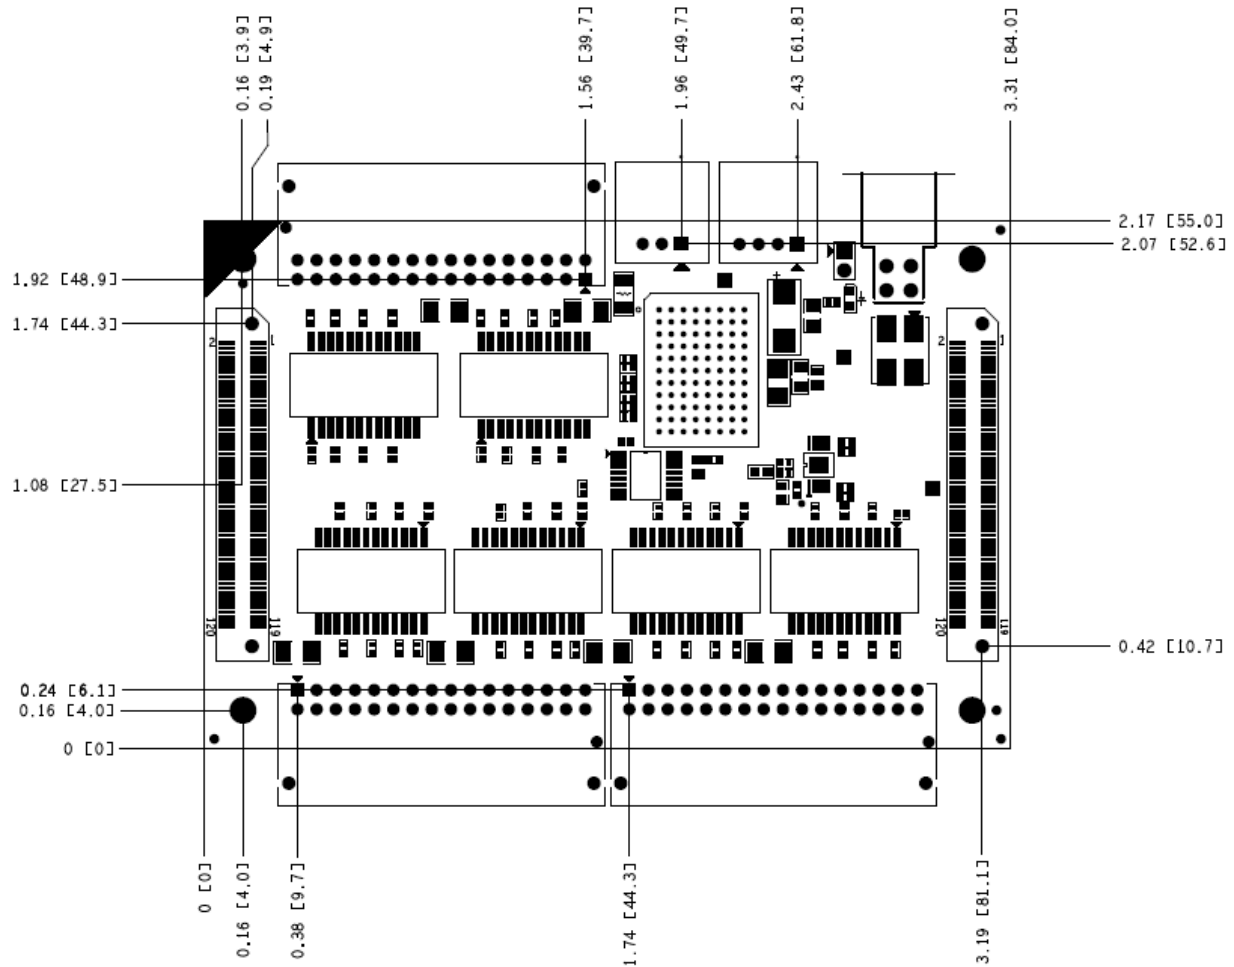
Mechanical Drawing of EPS-12000-CM Carrier Board
